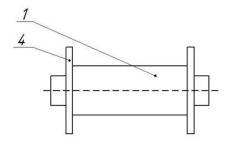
Casting roll with collars [6]: 1 - mill roll crystallizer; 4 - collars
